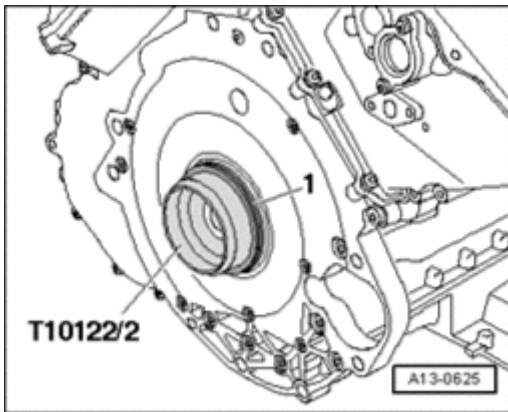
Installing Pull Sleeve T10122/2 With Sealing Ring Onto Crankshaft
